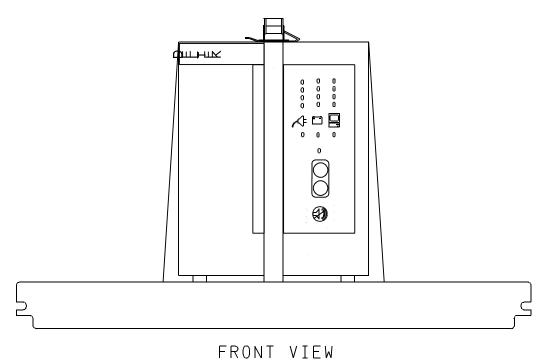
Power Supply Assembly 1A4 (Sheet 1 of 2)
